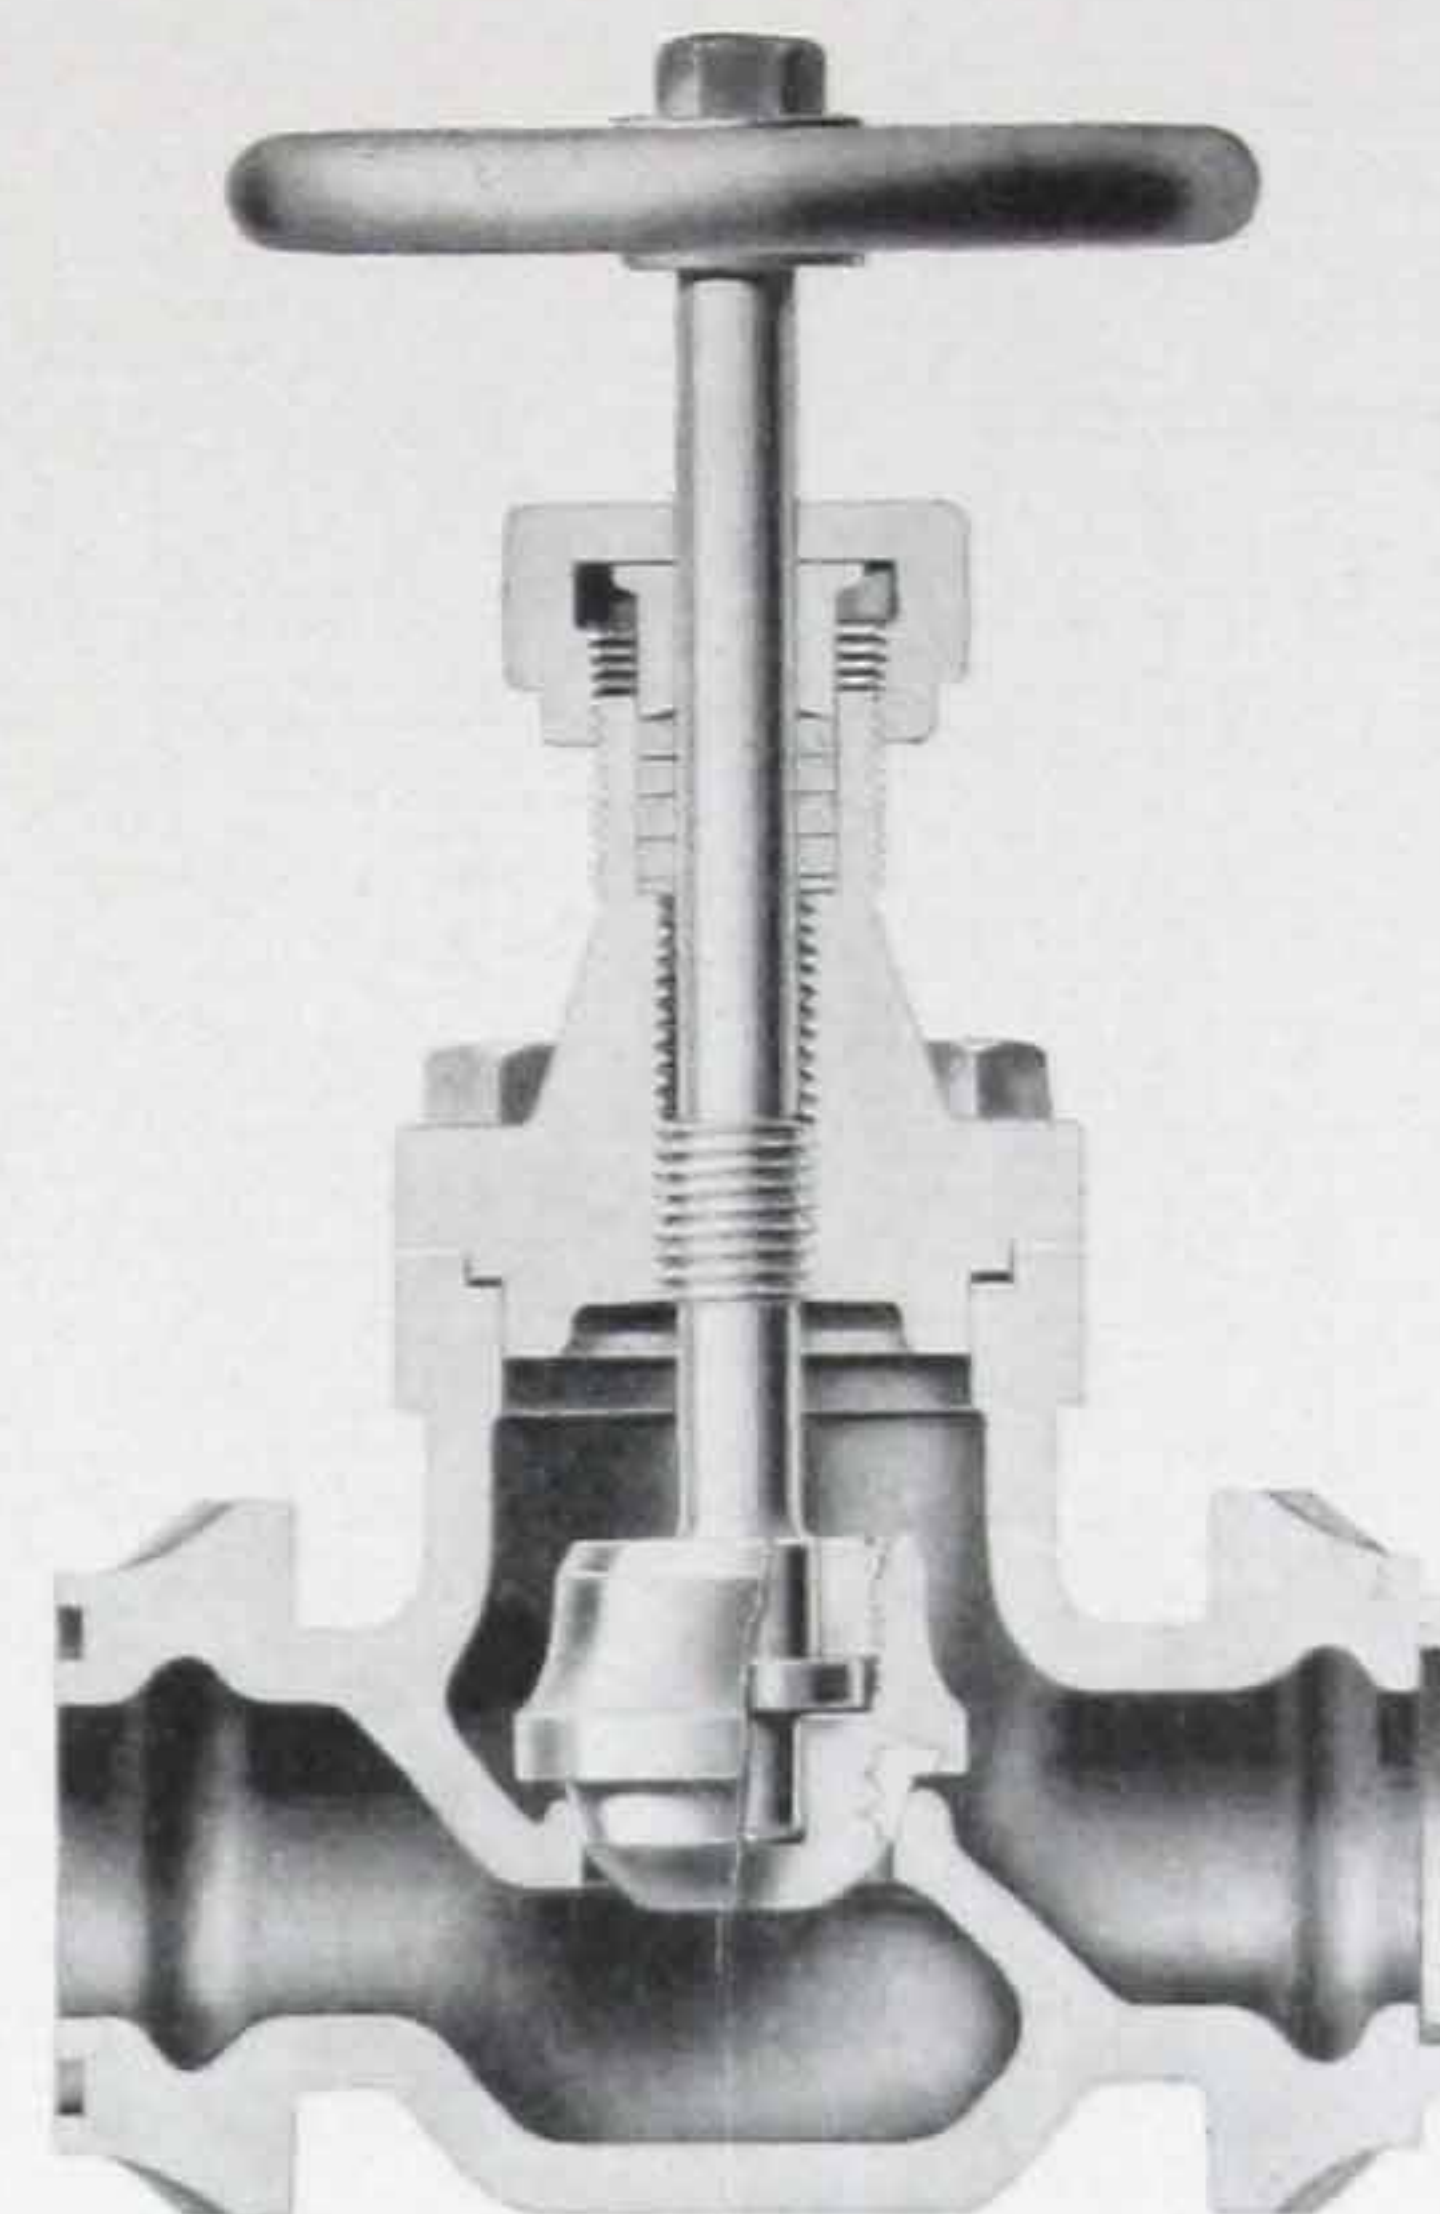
Section Through Frick Valve, Showing High-angle Seat
